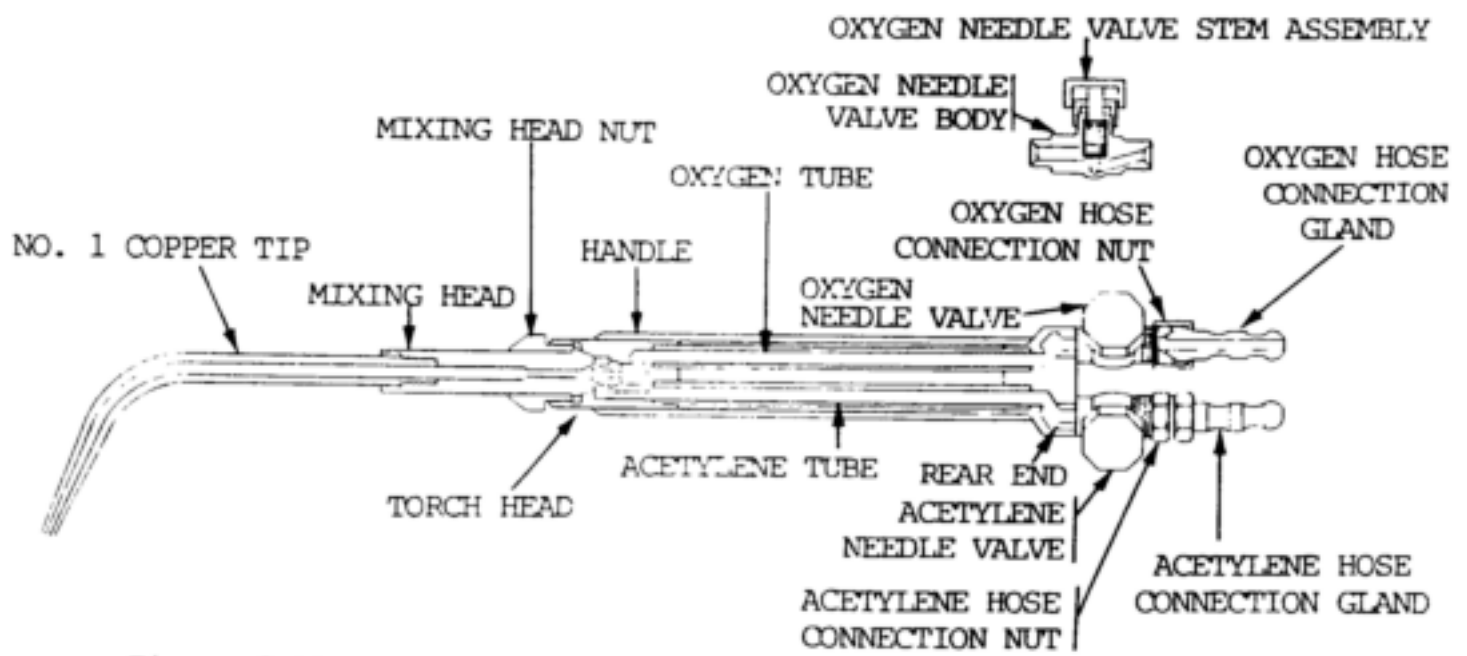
Equal pressure type general purpose welding torch.
